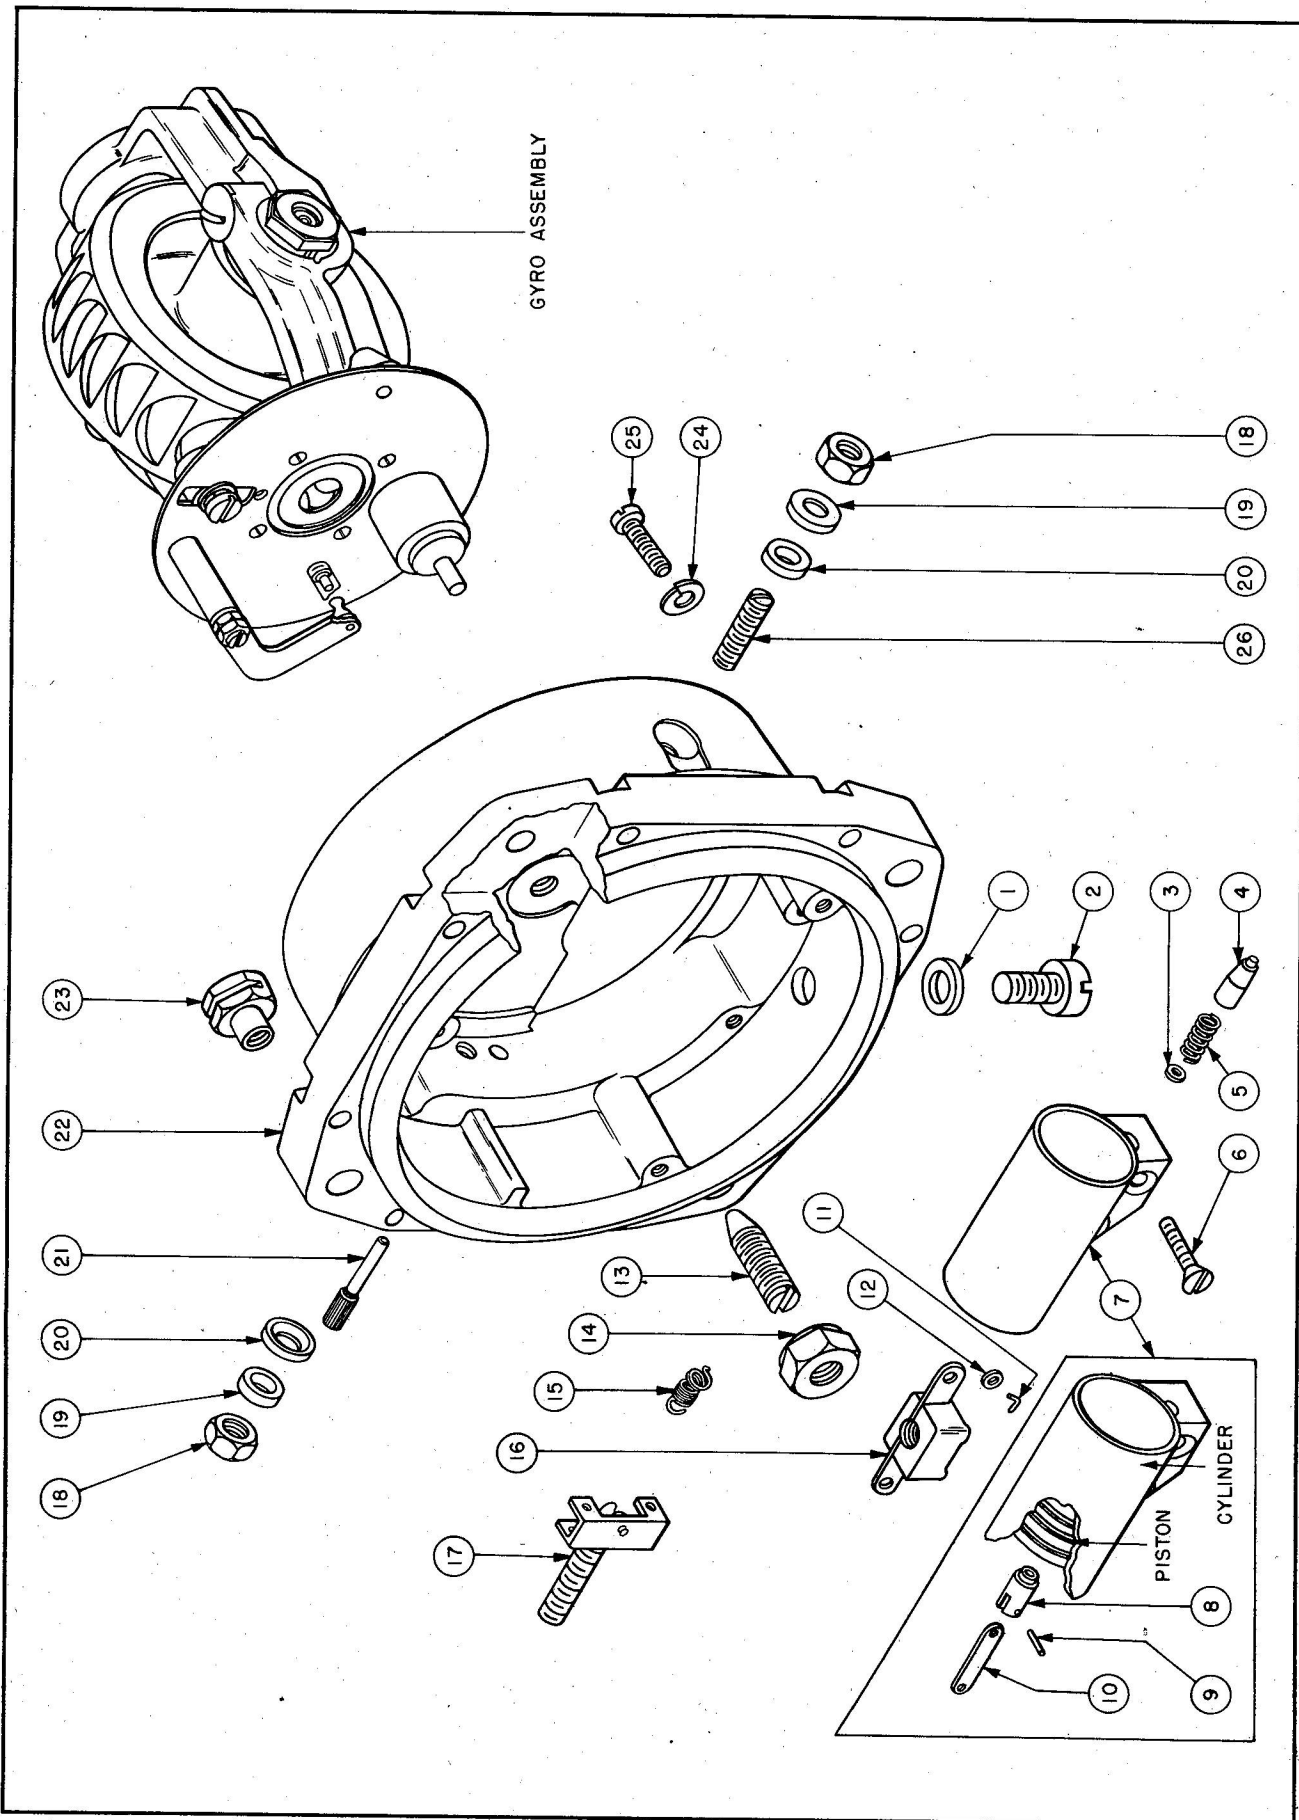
Exploded View Drawing—Front Ring Assembly—Type A-8 (Pioneer Type 1718-2S-A2).
